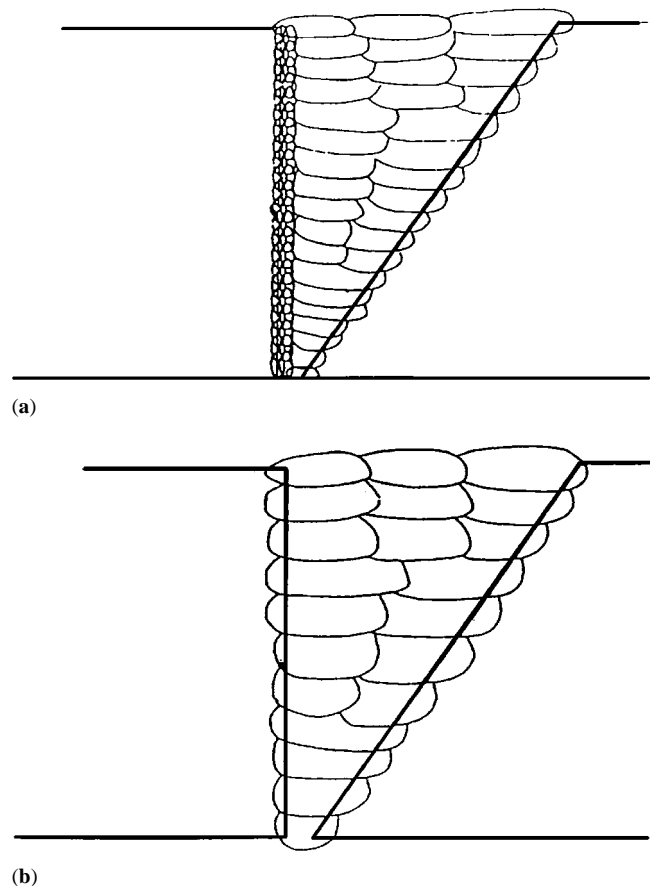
Schematic diagram of the placement of the weld beads in: (a) the temper bead-temper bead weld, and (b) the conventional weaving weld^[15]
